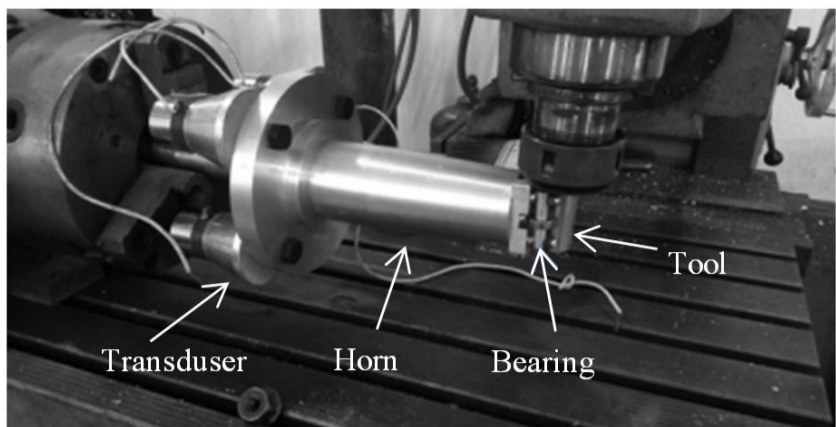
Ultrasonic package mechanism and its appurtenances mounted on milling machine
